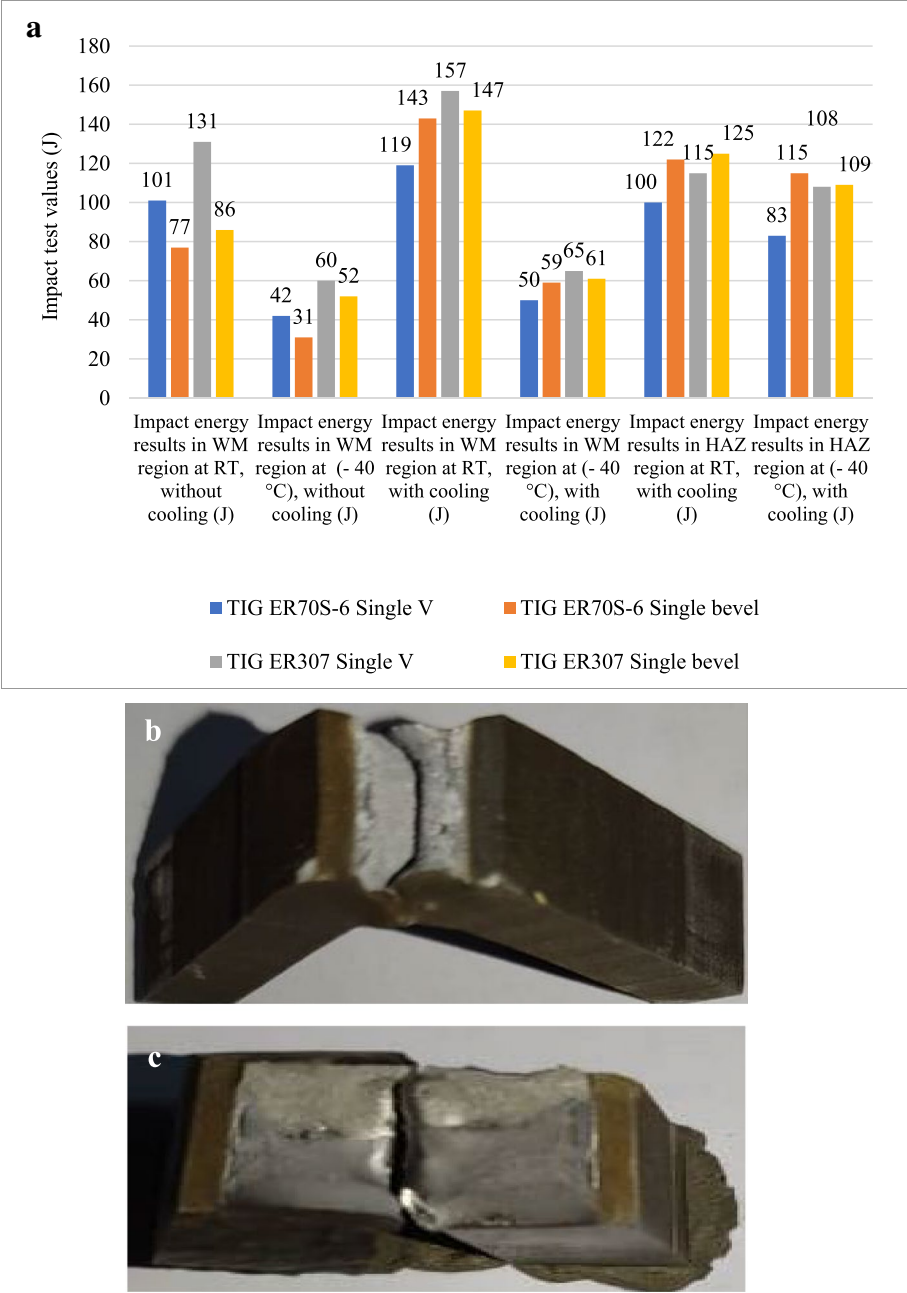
a Charpy V-notch impact values of welded joints. b Fracture surface of the impact test where V-notch is at the welded metal. c Fracture surface of the impact test where V-notch is at HAZ
